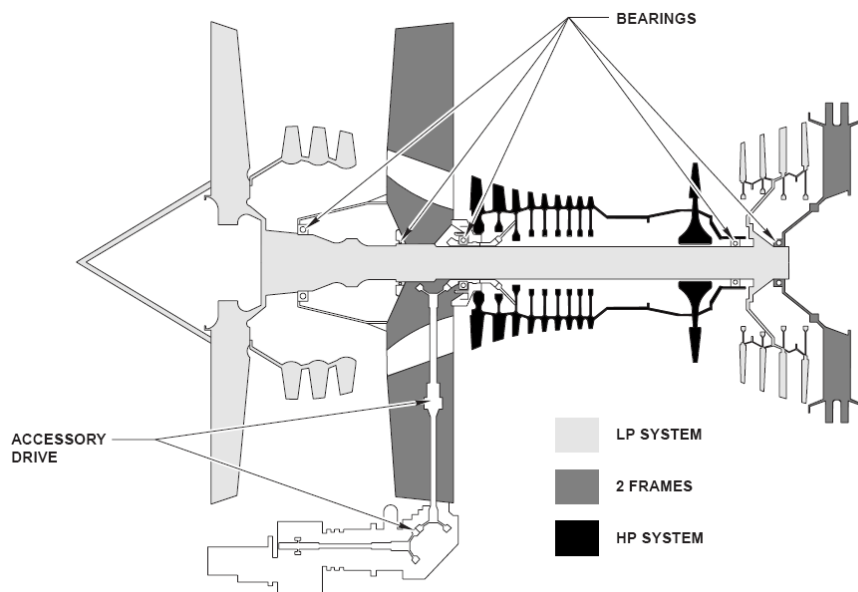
Engine rotor and frame assembly, obtained from [13]
